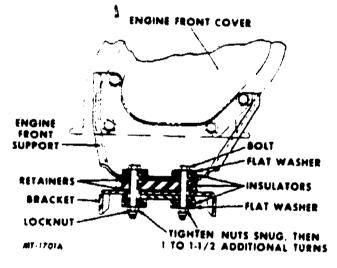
Engine Front Mounting With 5-Piece Insulator (Cab Forward Models).
